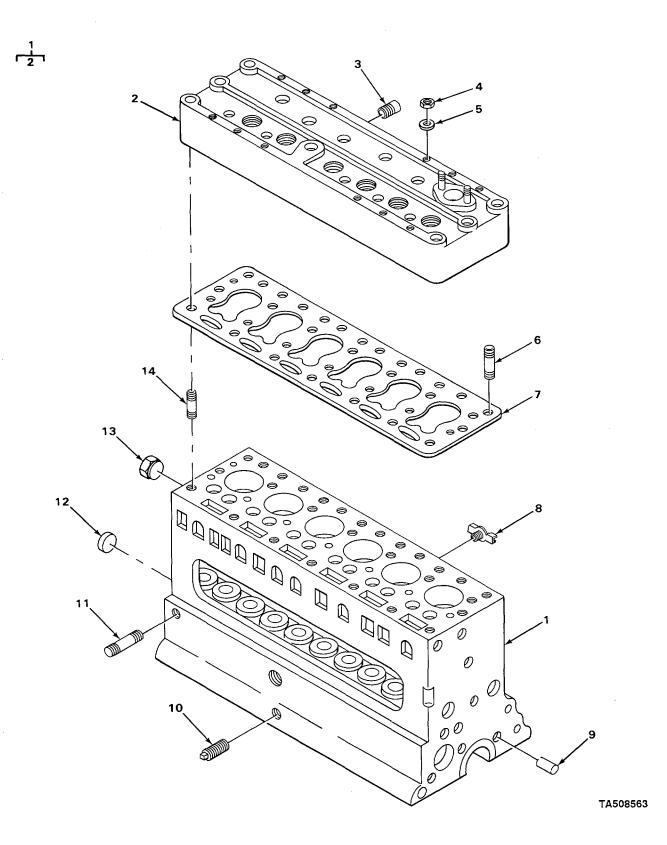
CYLINDER BLOCK AND CYLINDER HEAD.
